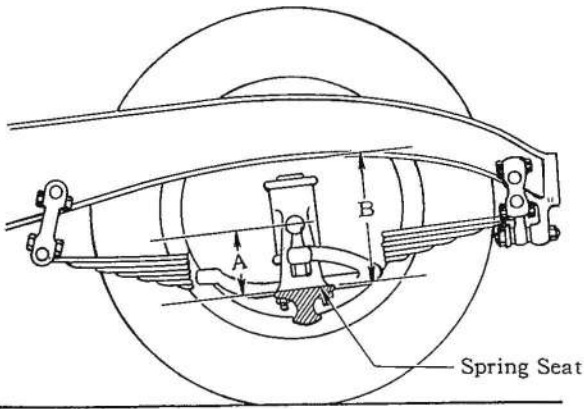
The dimension "A" given in the Specification Table, page 18 is used for determining the location of the steering knuckle arm pivot. The dimension "B" also given on page 18 is used to determine whether the springs have sagged sufficiently to warrant replacement or rearching
